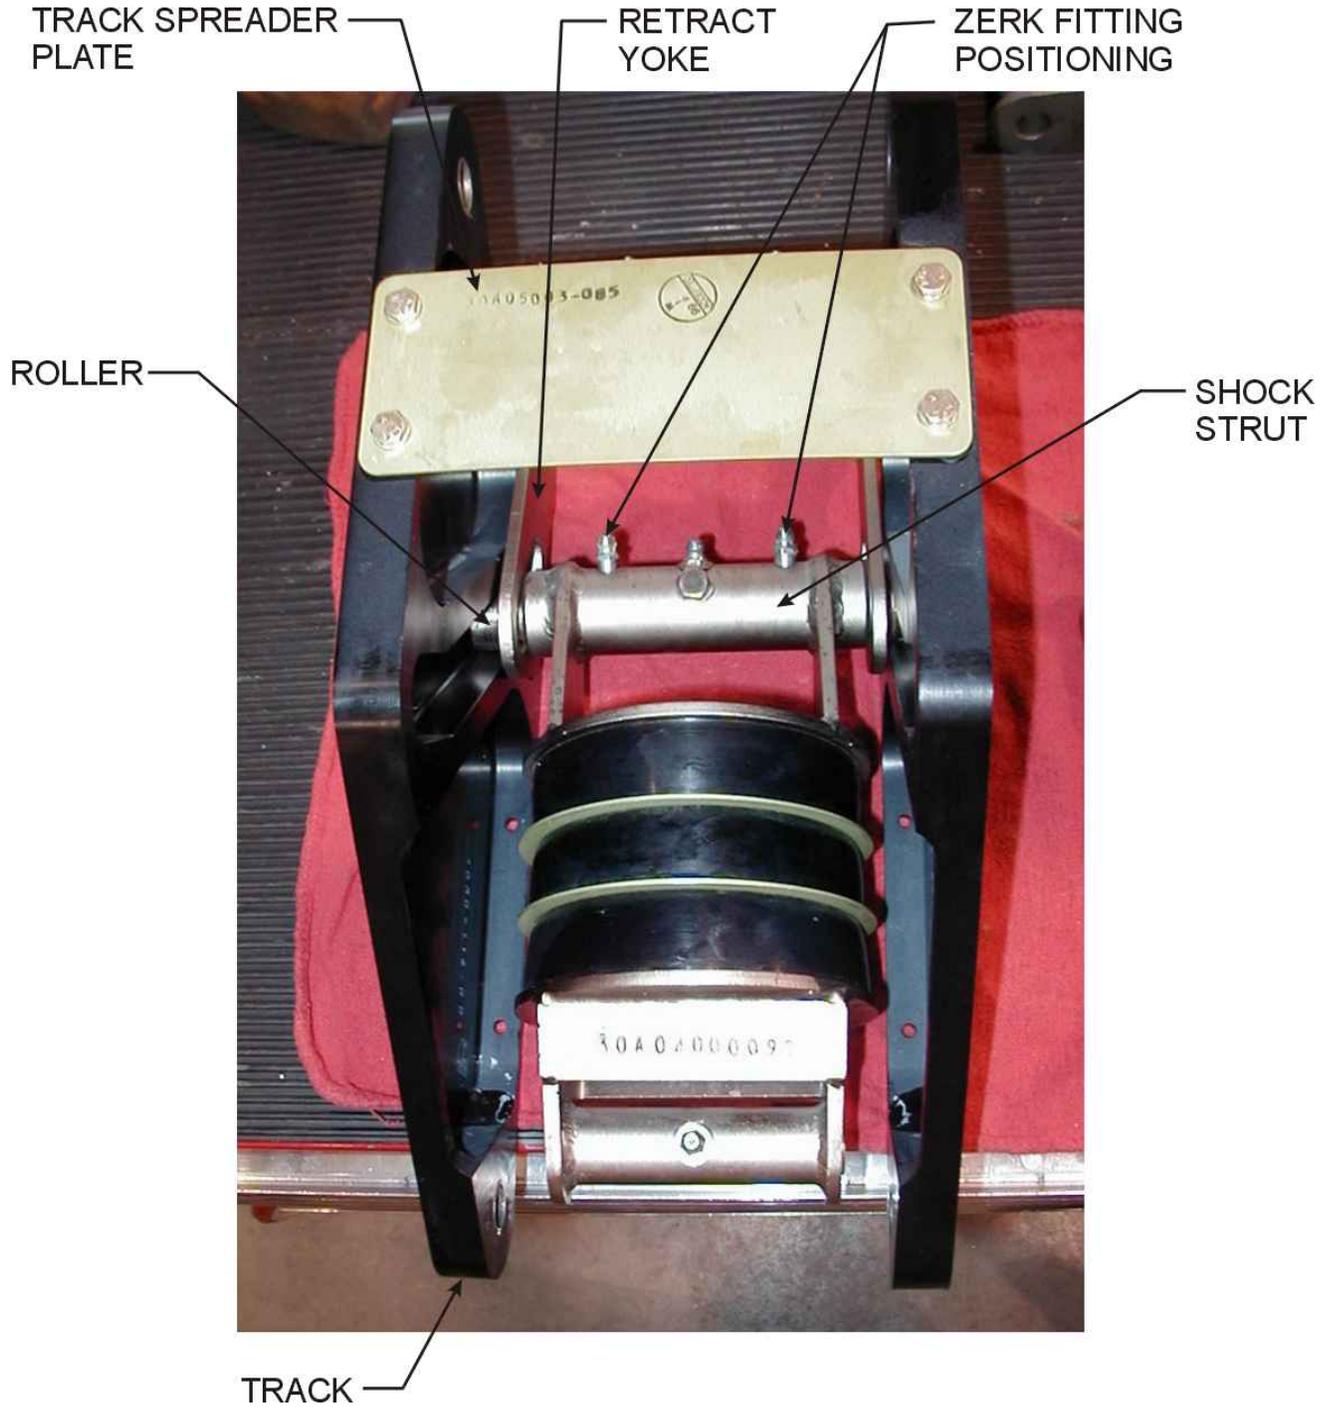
ASSEMBLED TRACK ASSEMBLY REMOVED FROM FLOAT
